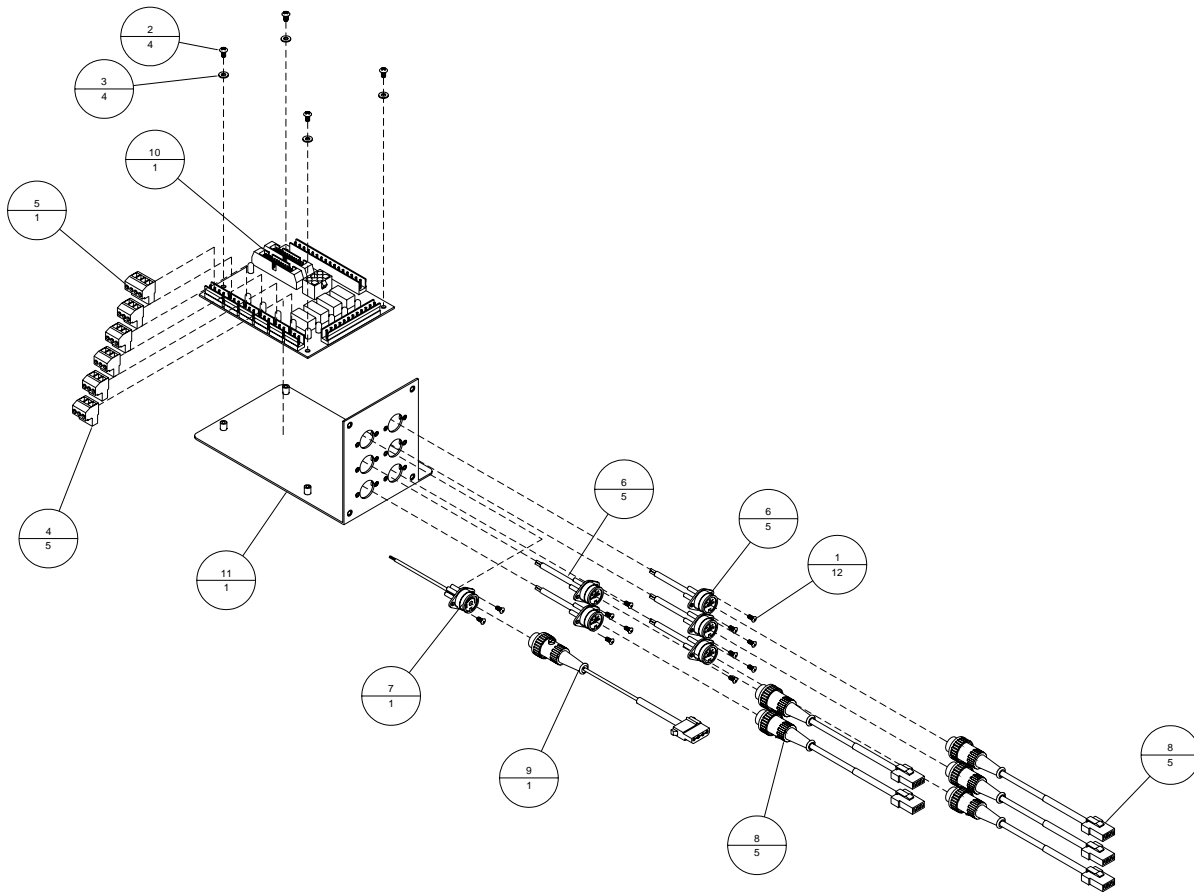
Field Connection Board Assembly, BK1700 (9103178A)
